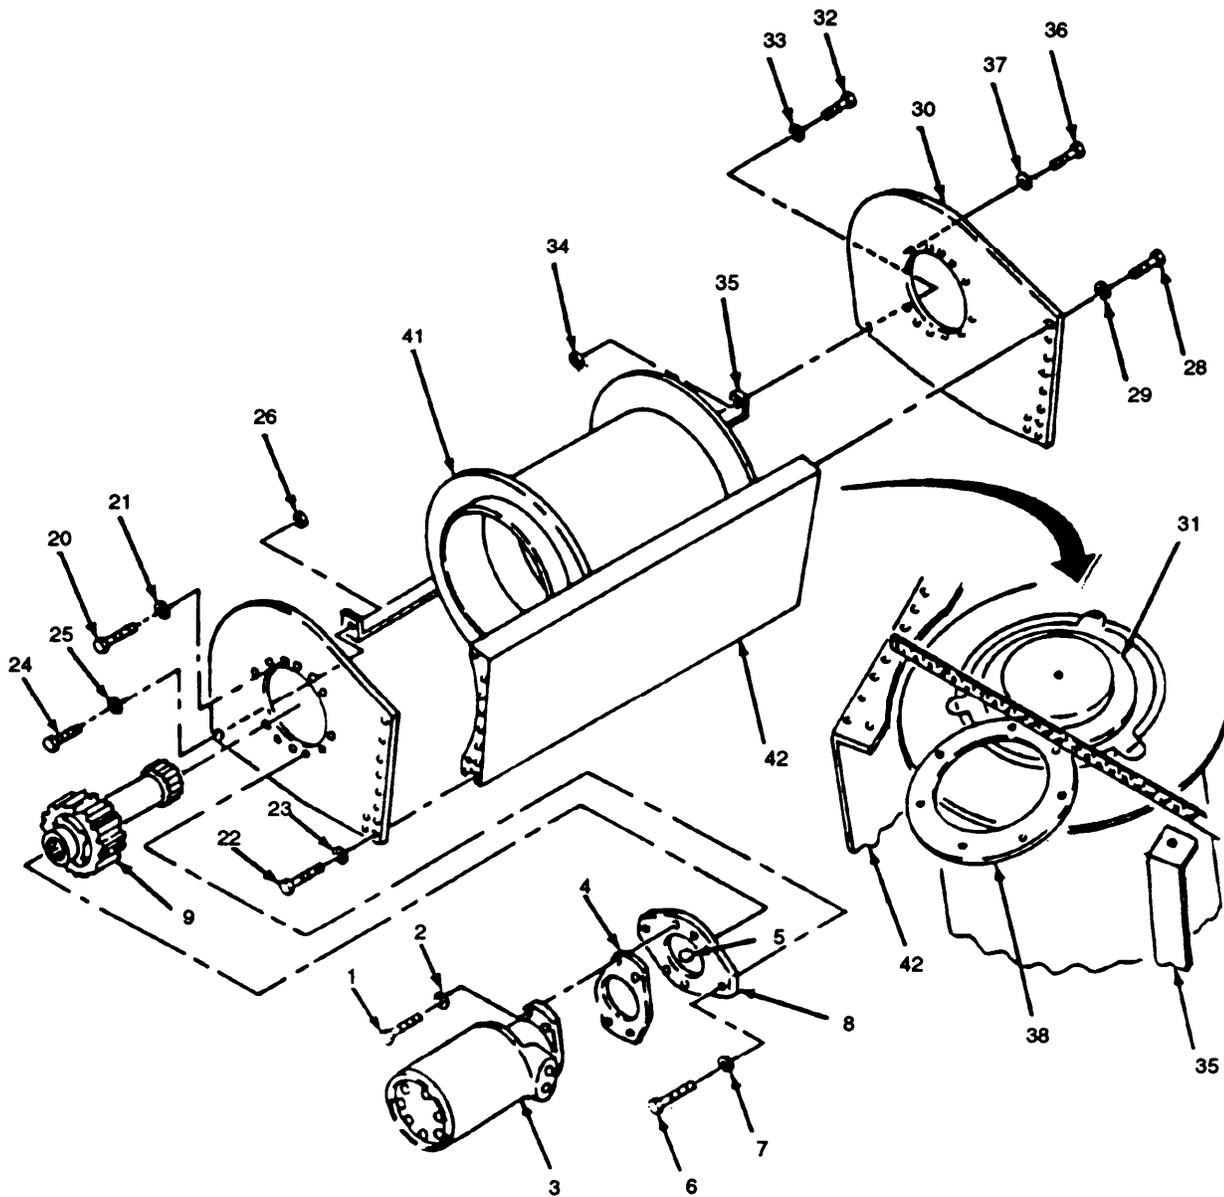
Winch Assembly Model PG-115-043R, Reassembly (Sheet 7 of 7).
